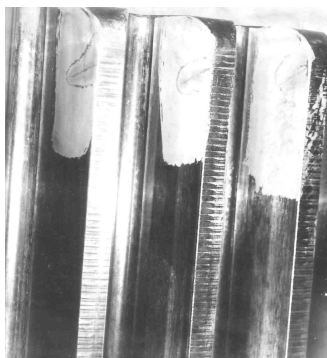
Unacceptable defects on the working surfaces of the adjoining cogs
